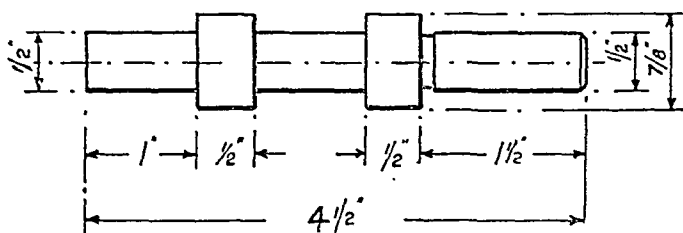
MULTI-SPINDLE AUTO. COMPONENT
